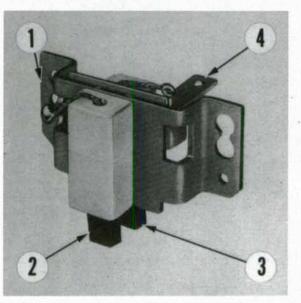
View of brush holder assembly showing continuity test points. Refer to text.
